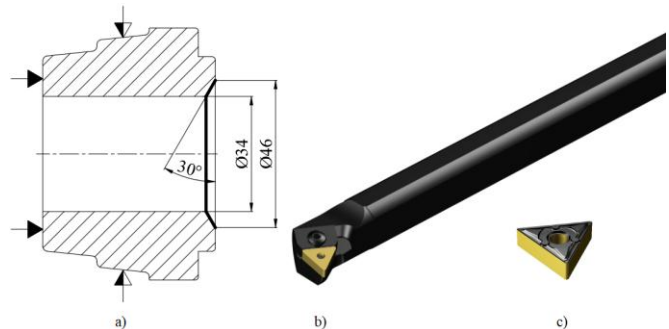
(a) Fourth pass, (b) Shank tool, and (c) Indexable insert
